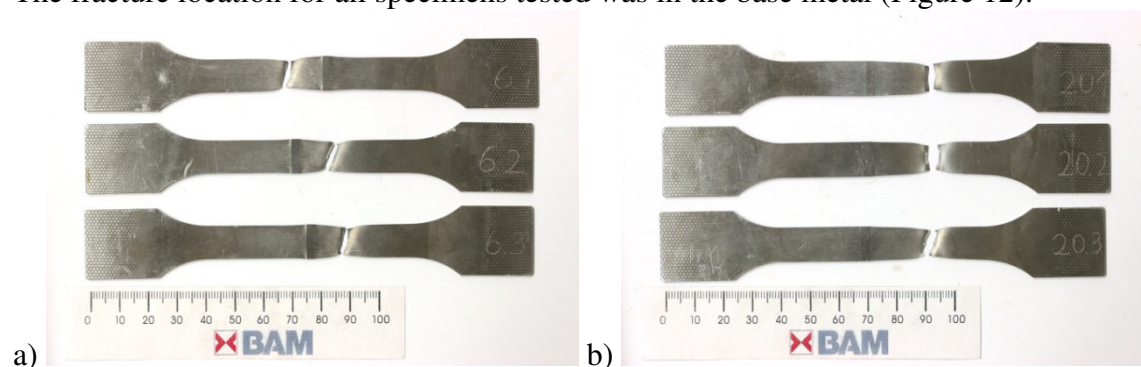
Tensile test samples with fracture location in the base metal: autogenous laser weld (a); HLAW (b)
